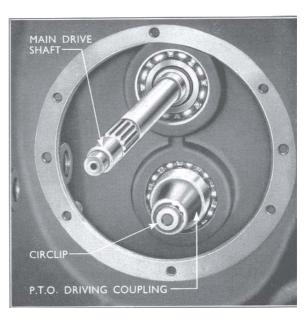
P.T.O. Countershaft Driving Coupling
